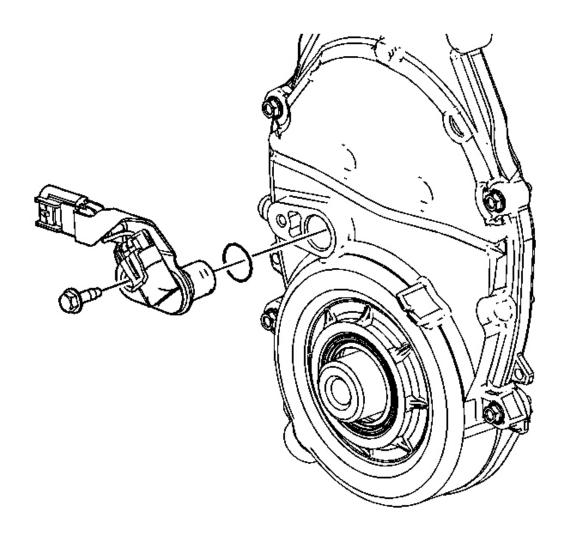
camshaft position sensor & bolt Courtesy of GENERAL MOTORS CORP.
